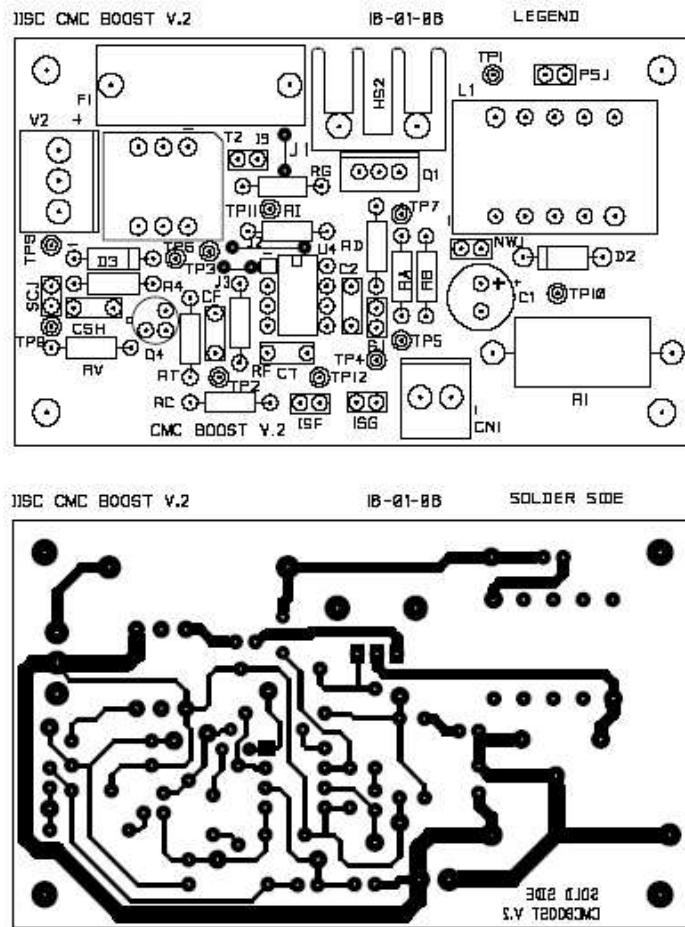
Solder and Component Side of CMC-Boost Converter
